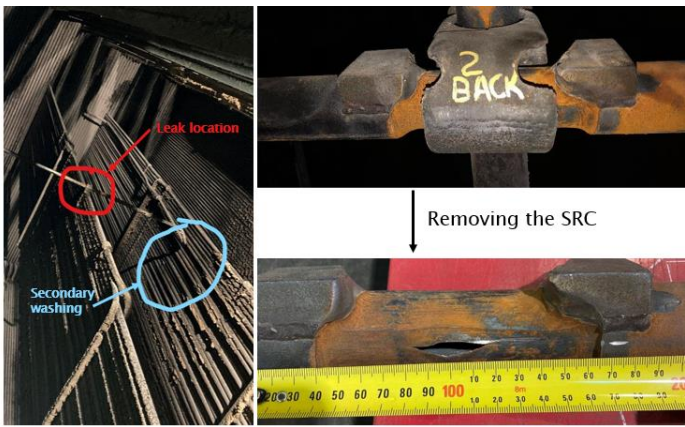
Findings: fretting of tube 1.75”x0.375” under split ring casing (SRC). Tight crack 30mm long thin wall tube rupture with secondary washing over failure area.
